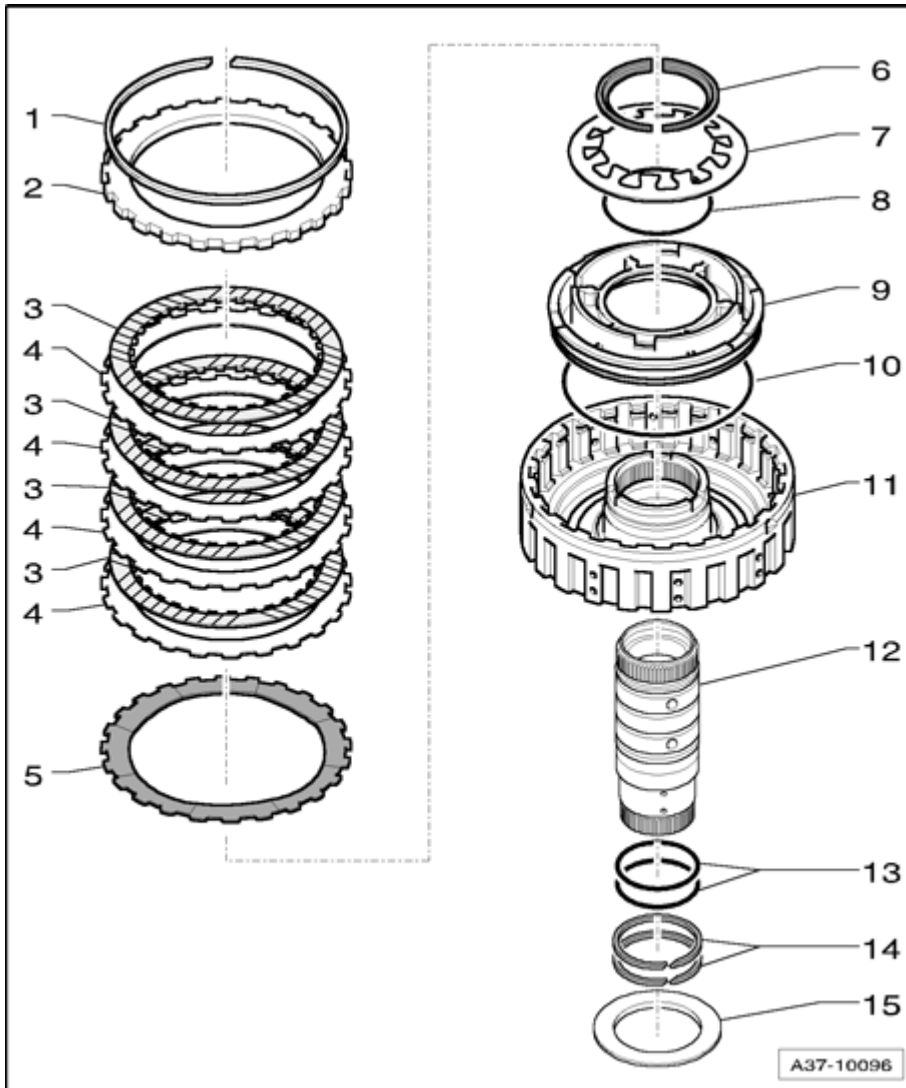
Clutch "C" With Sun Shaft, Assembly Overview
